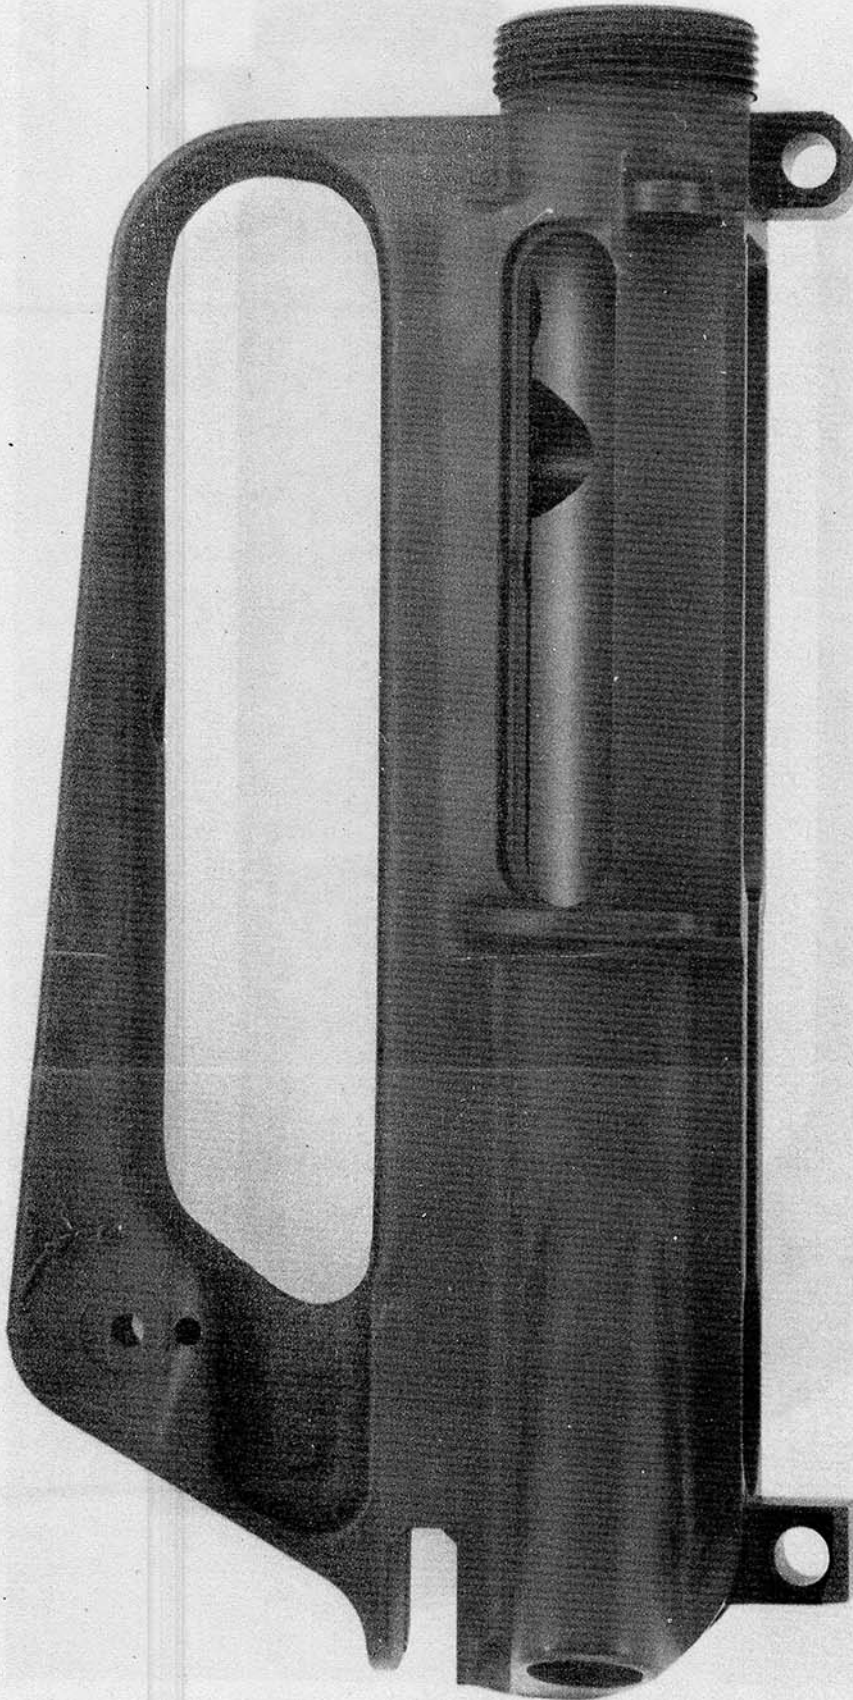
Upper receiver (US supply part - "LM" manufacturer mark).
